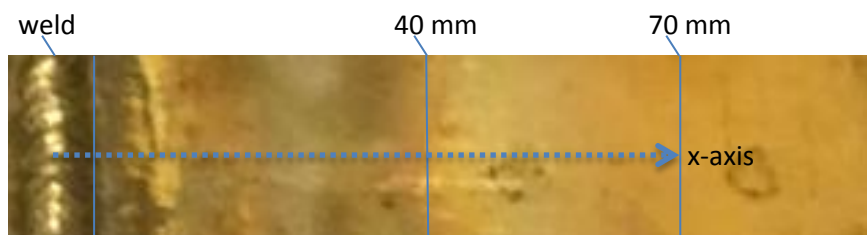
photo of weld and discoloration. Weld shown at left side of sample, discoloration can be seen up to 40 mm away from the middle of the weld.
